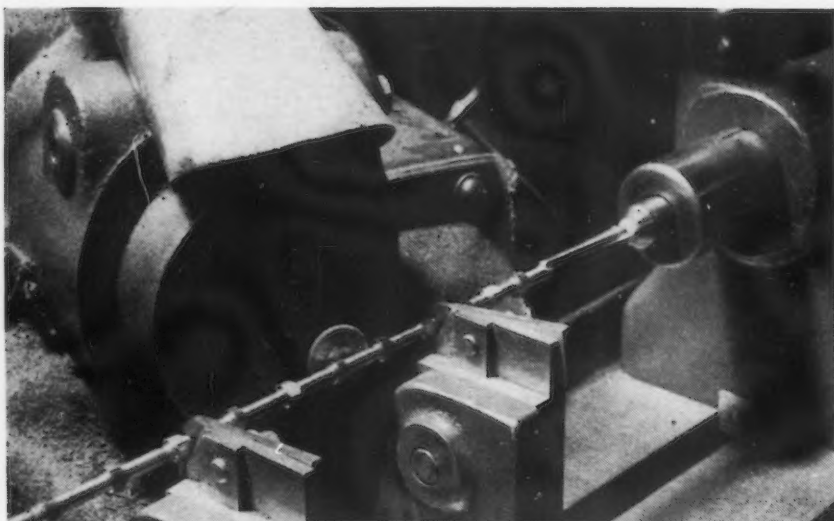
Regrinding a rifling broach, showing the small diameter grinding wheel used to hollow grind the tooth rake angle.
